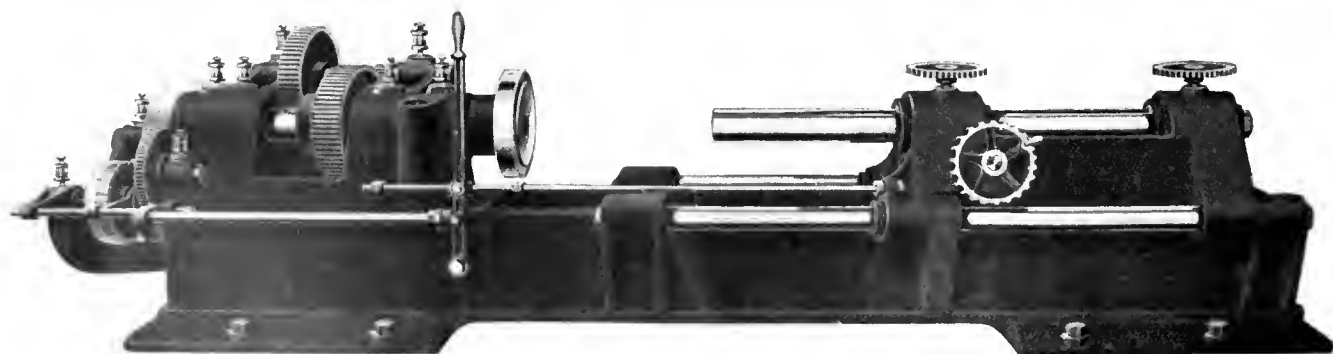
DRILLING MACHINE FOR BORING LARGE SHELLS
